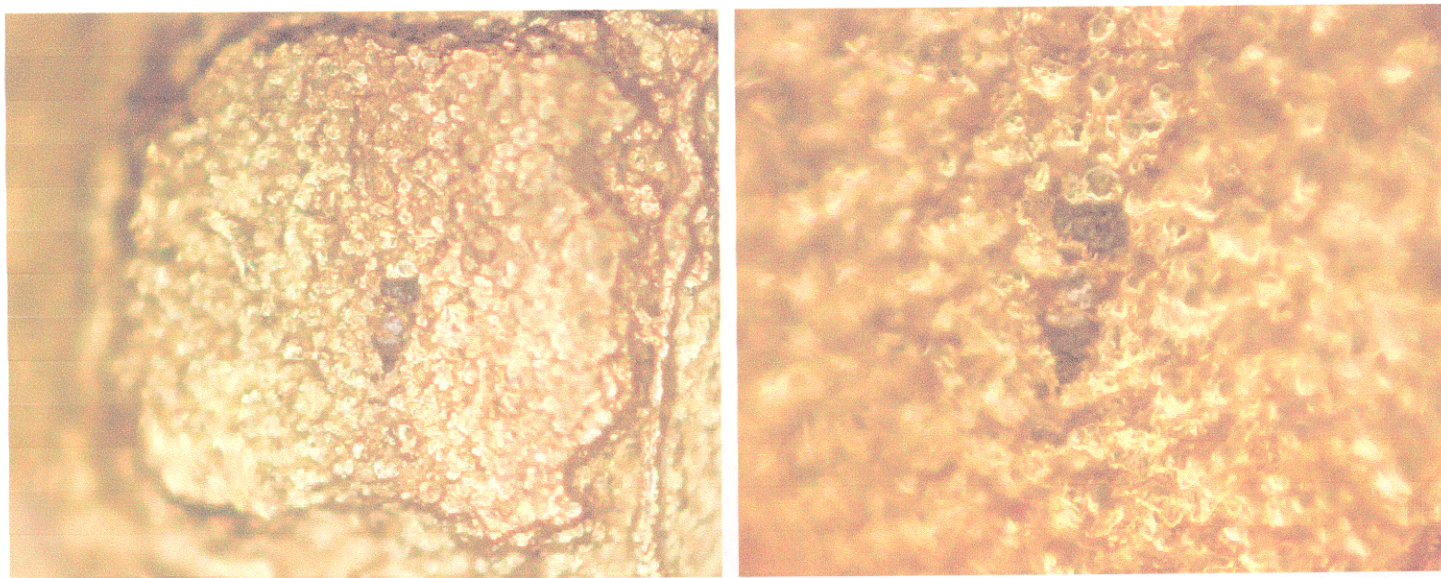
Optical images taken prior to removal of D9 from the assembly show the same area and the remaining wire bond foot-print on the gold plated surface.
